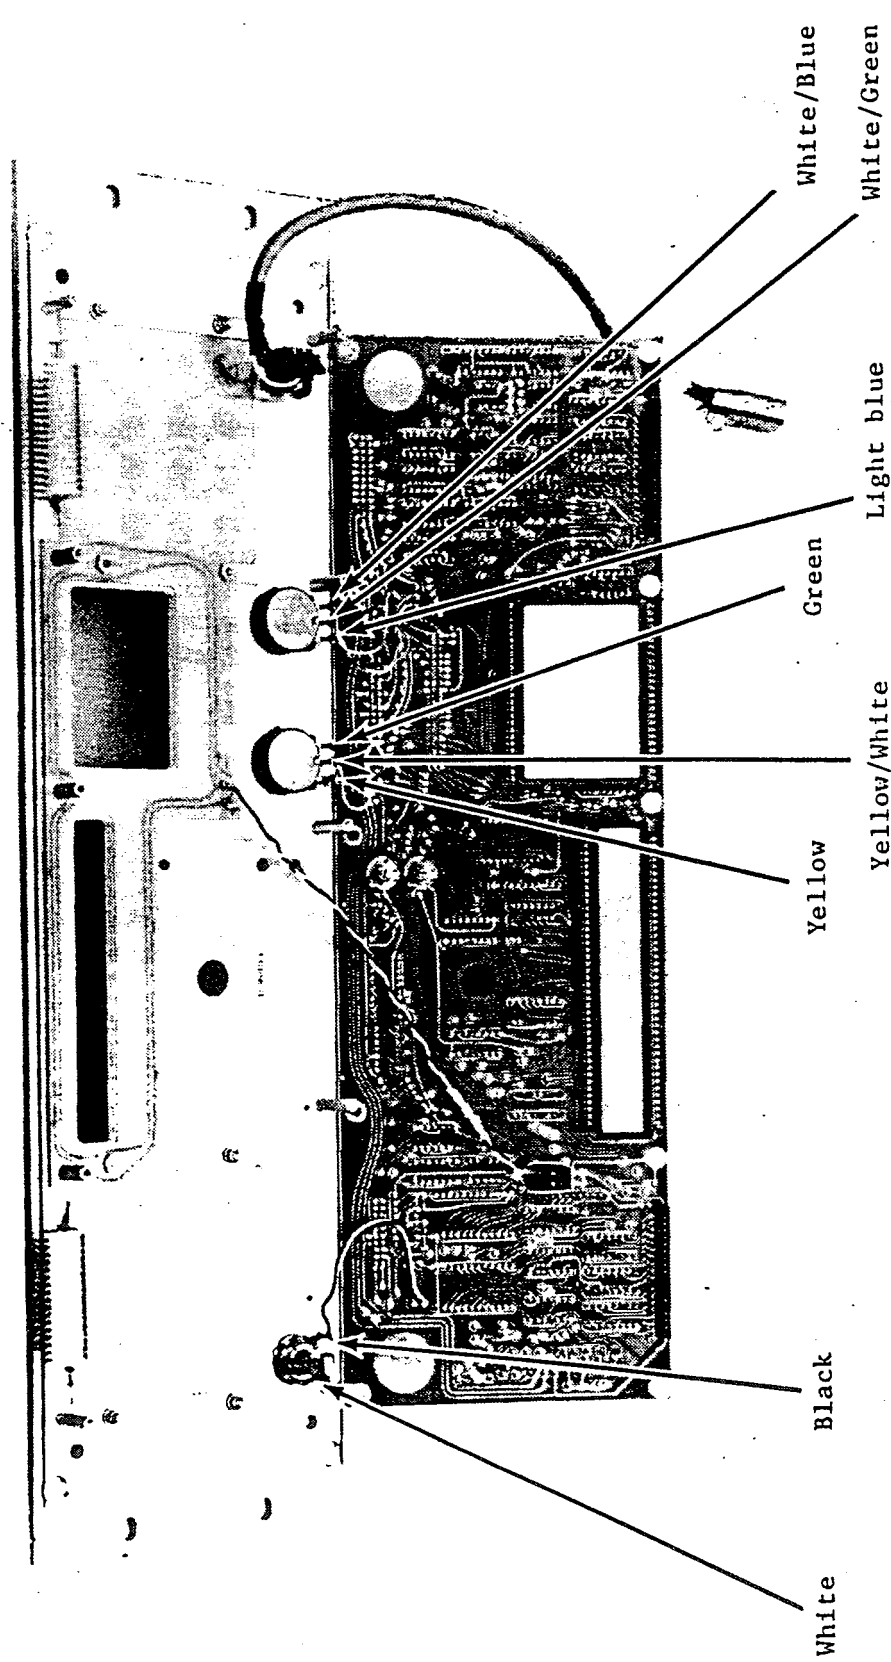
Wiring Detail, A9 Circuit Card Assembly
